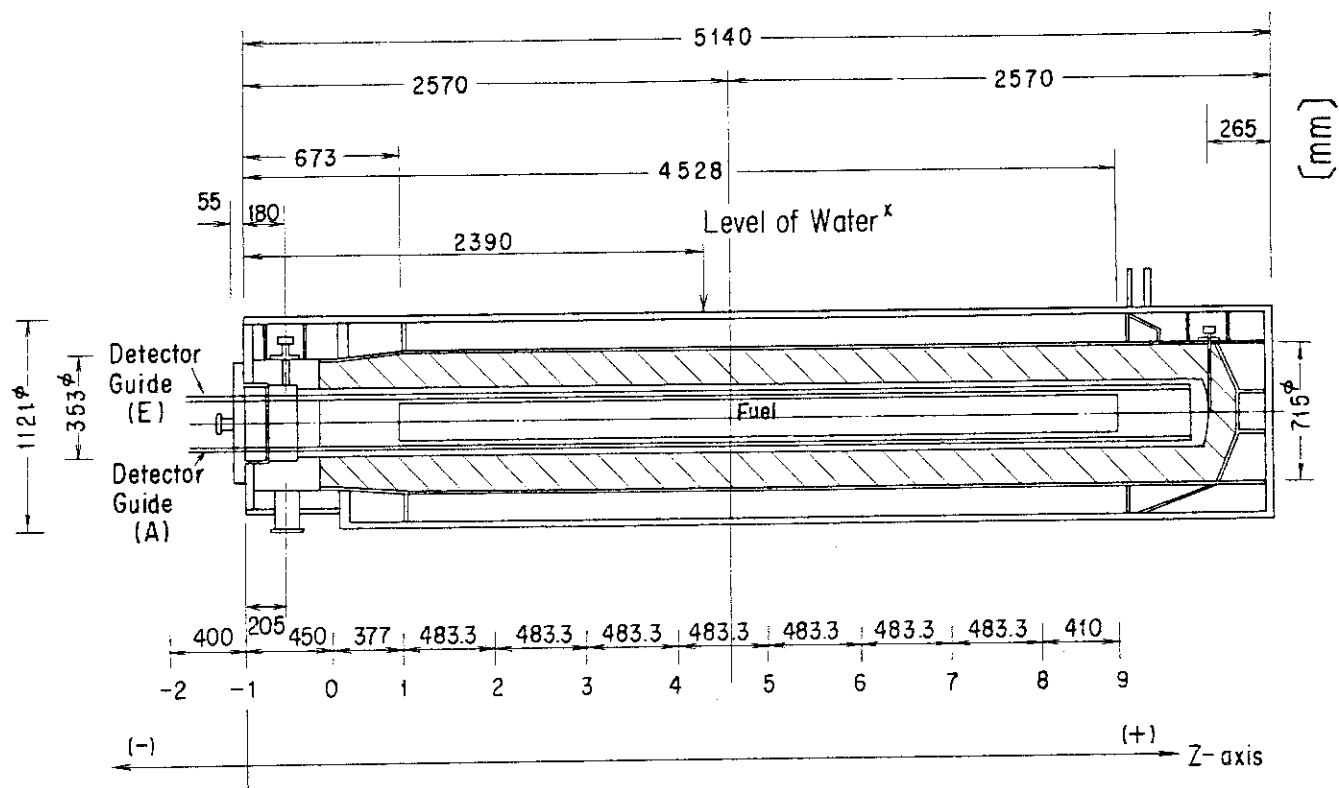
A cross sectional view of the NH-25 transport cask containing a PWR fuel assembly
